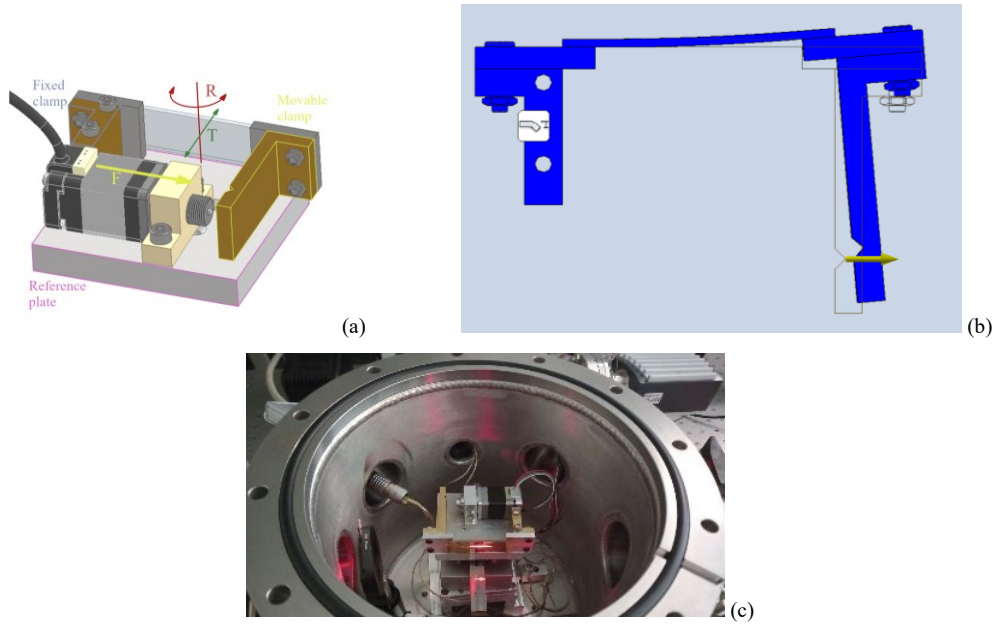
(a) CAD model of the bendable grating assembly; (b) leverage principle applied to the grating; (c) mechanical assembly in the experimental chamber.
